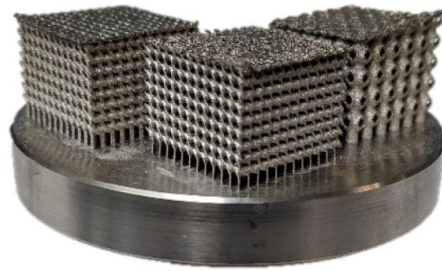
Example of parts produced by SLM technique fastened to the build plate with supports [22].
